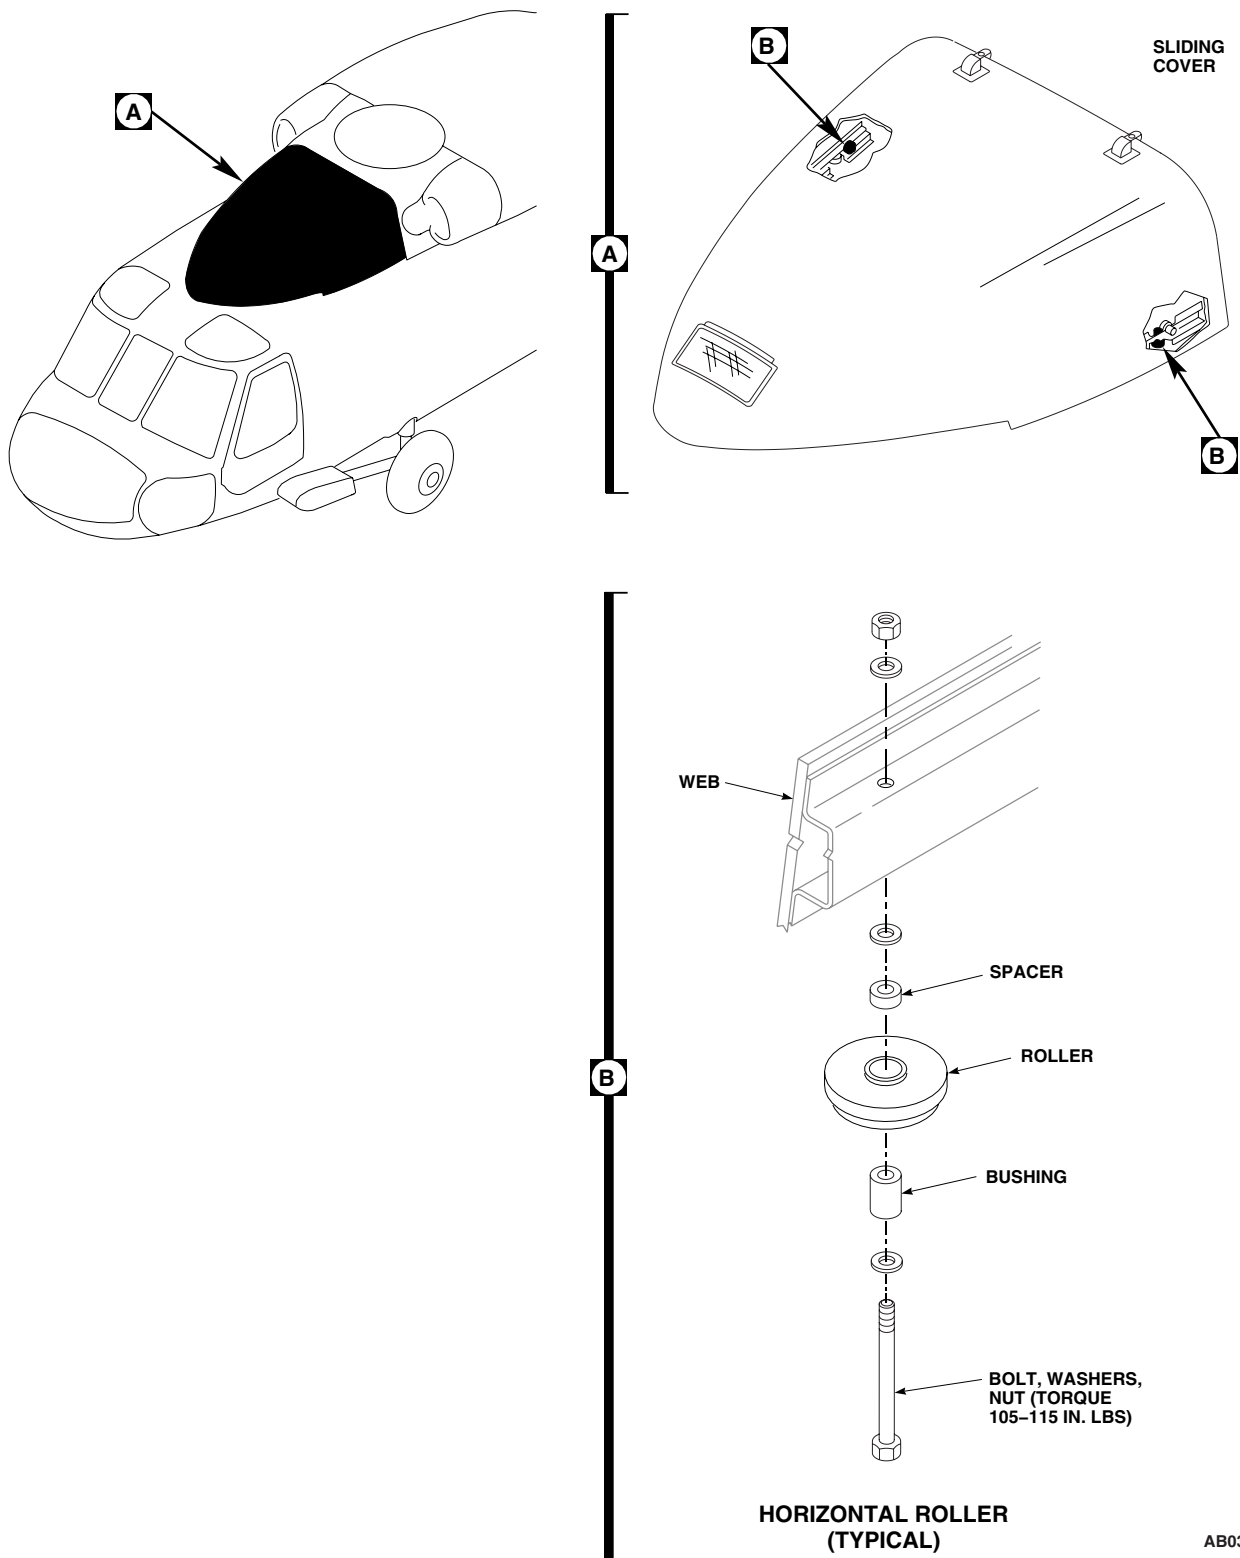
Replace Main Rotor Pylon Sliding Cover Horizontal Rollers.
